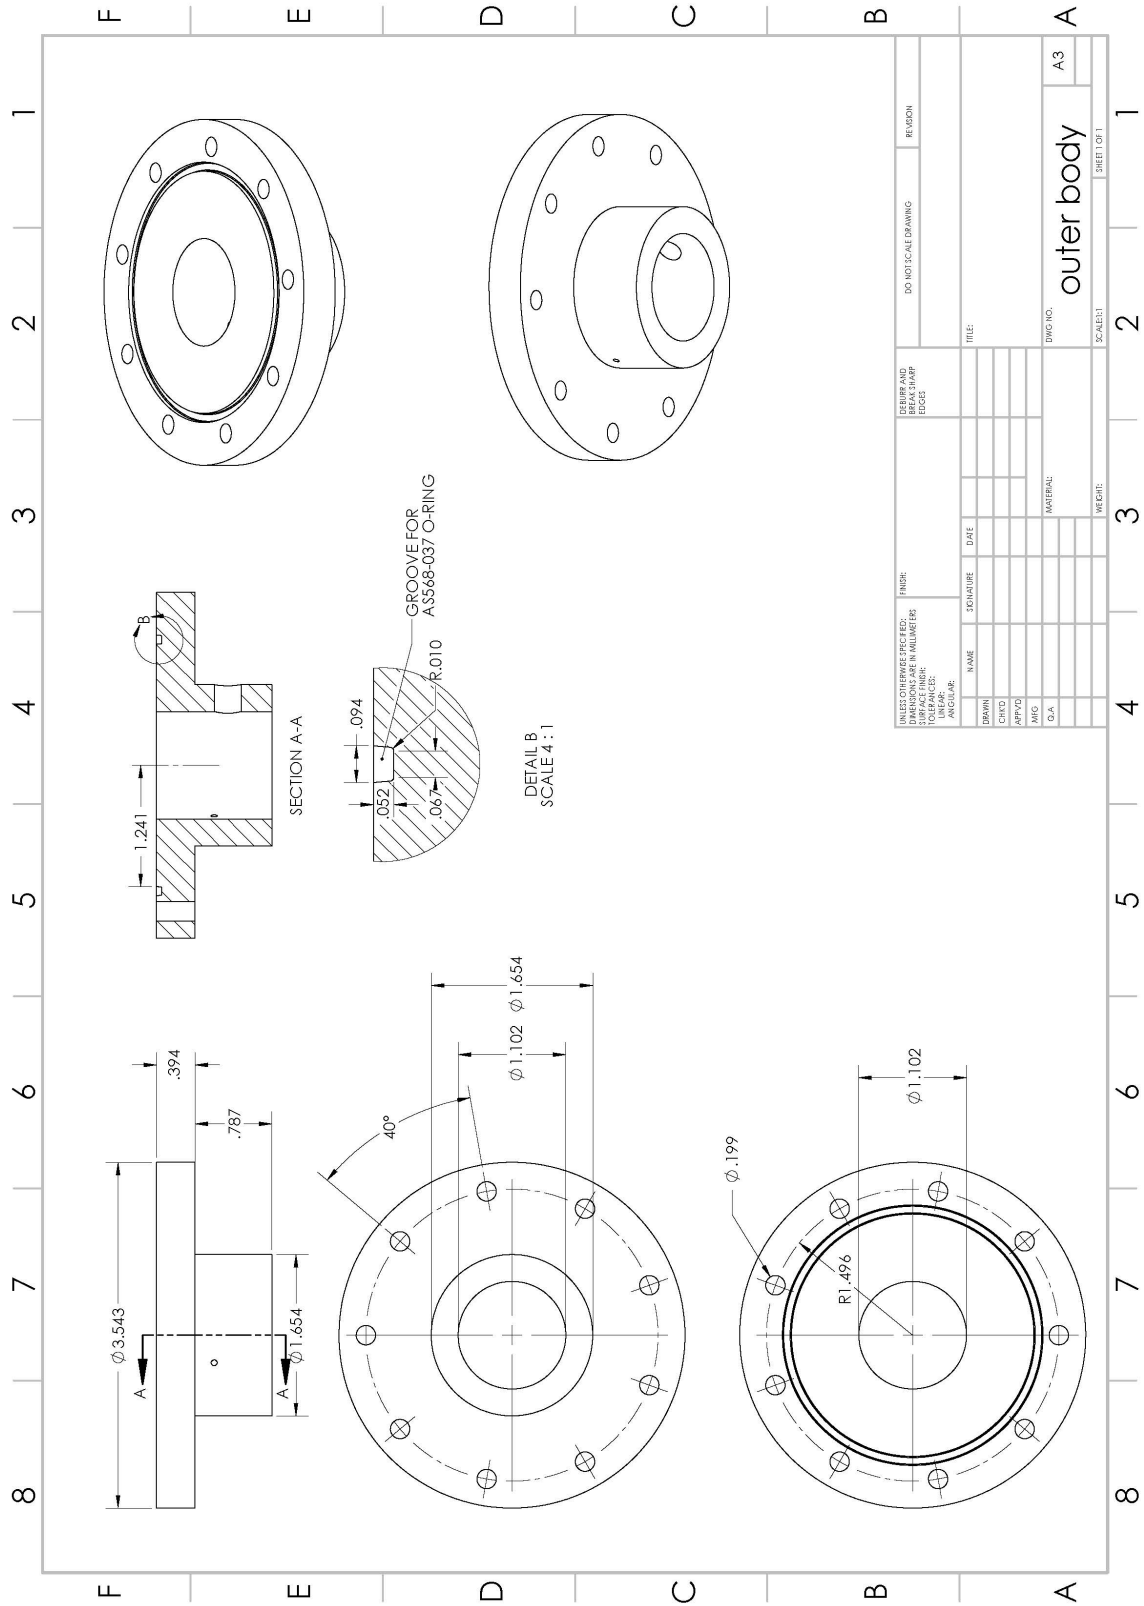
Machine shop drawing for the  $\epsilon = 0.40$  nozzle
